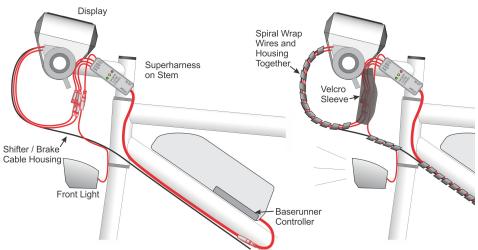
Recommended wire management strategy that eliminates need to bundle excess cable. Wires (shown red) should follow existing shifter/brake cable housings (black). Multiple short pieces of spiral wrap is easier to handle than one long length.
